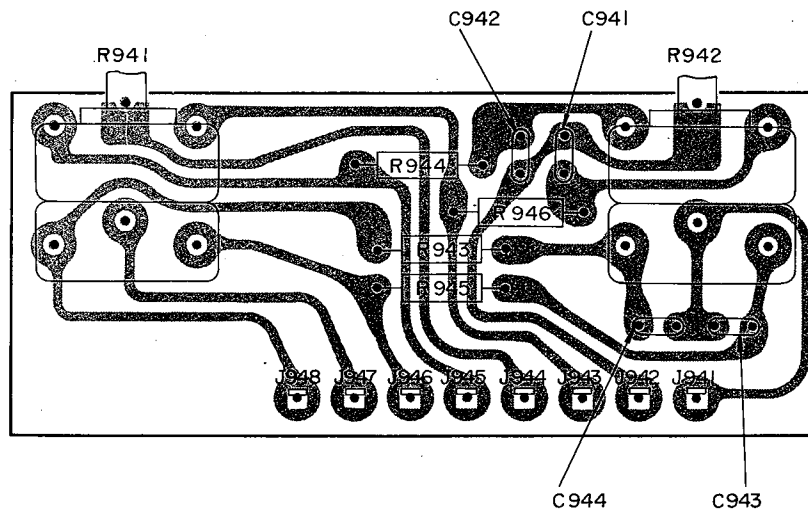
Tone Control Unit Assembly P940 Component Locations.
